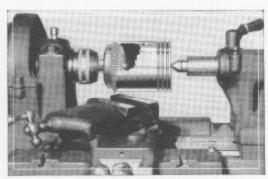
Reaming the Bevel in the Skirt of a Semi-Machined Piston
